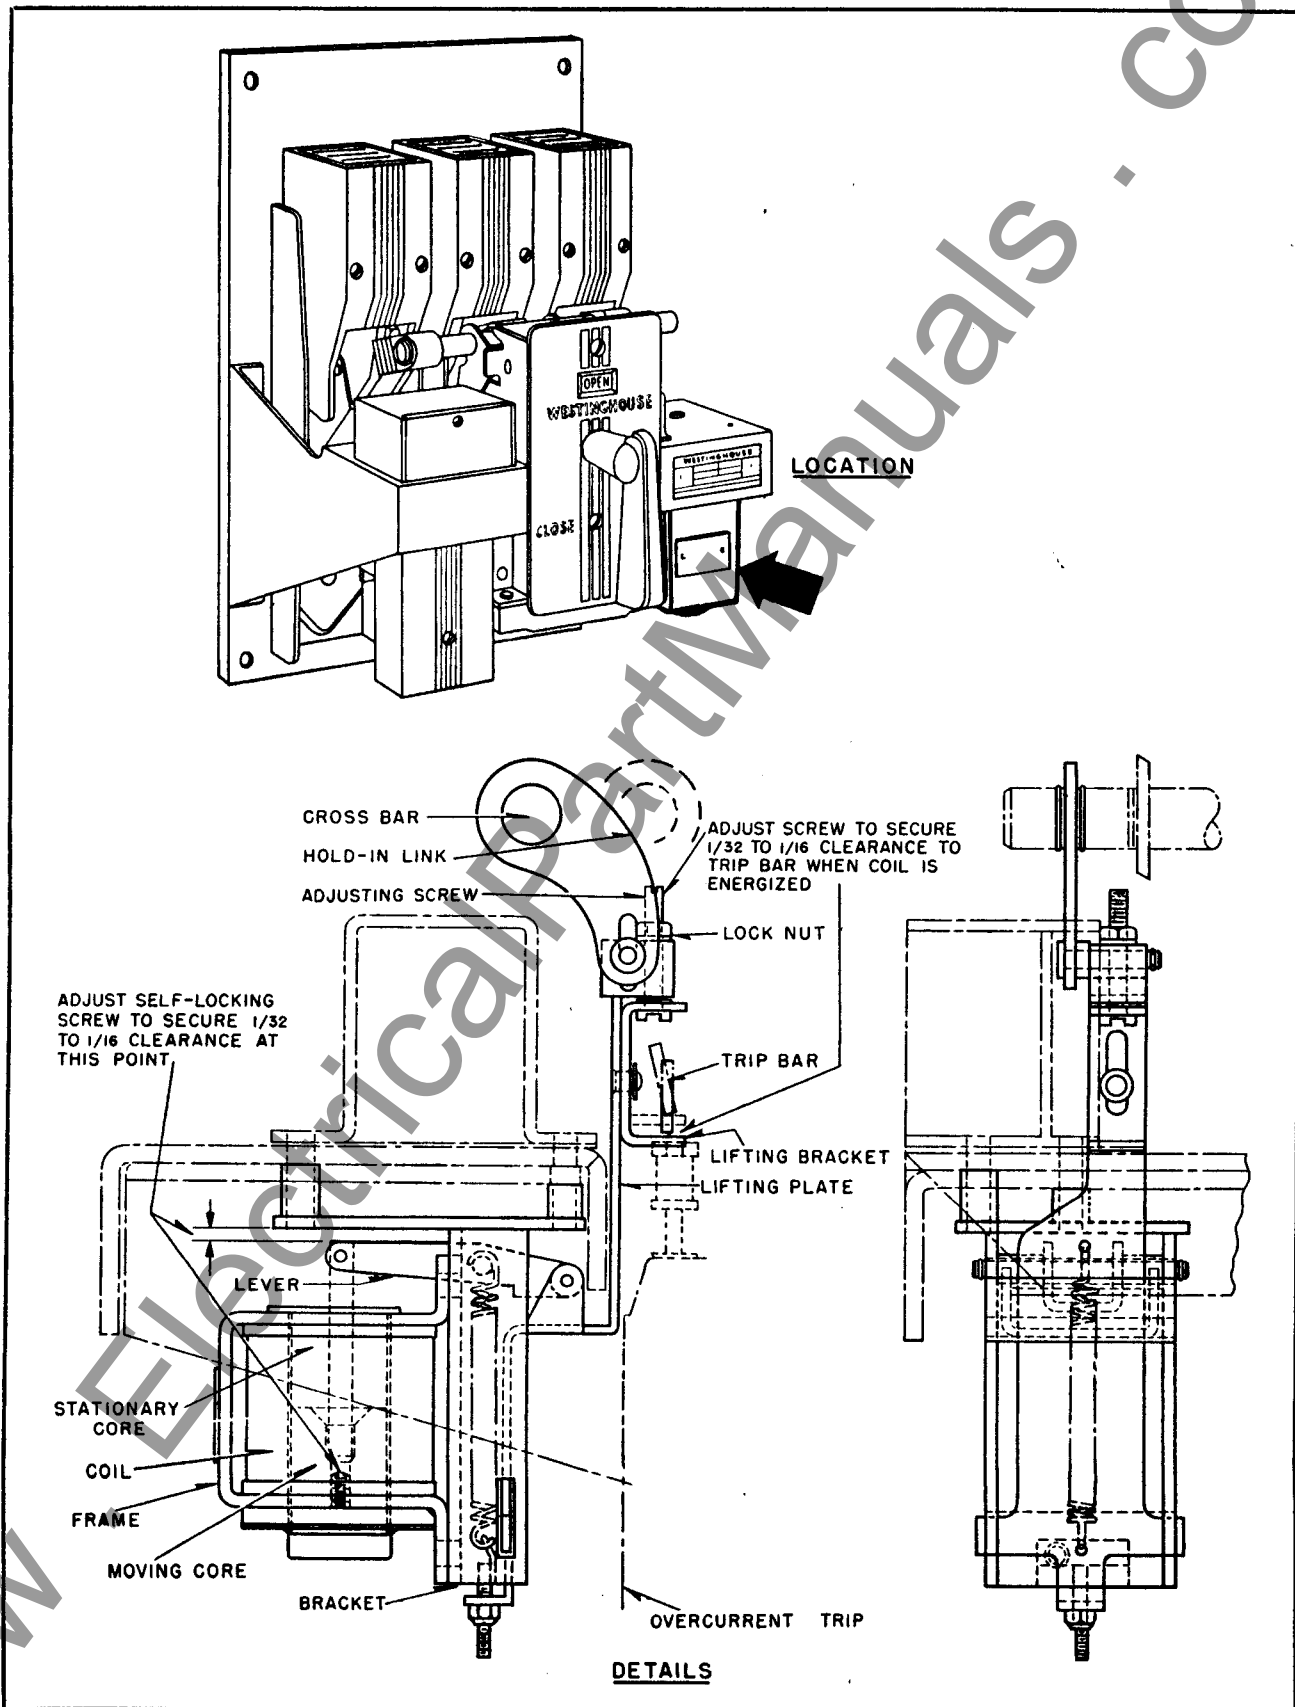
Electric Lockout Attachment—Location and Construction Details
